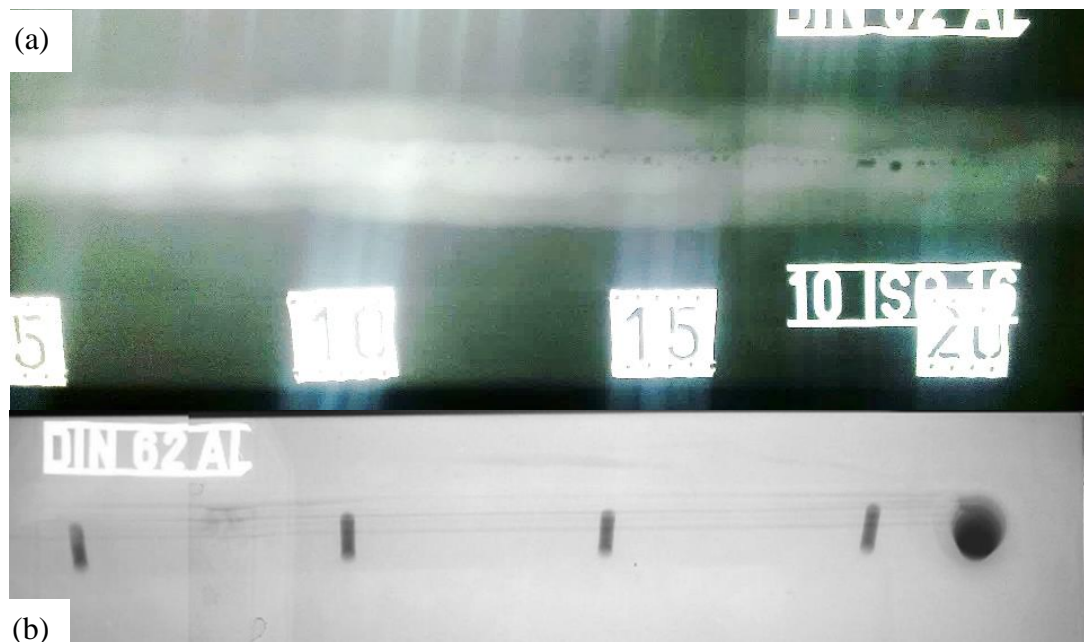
Radiographs (a) welded plates, (b) FSPed plate
